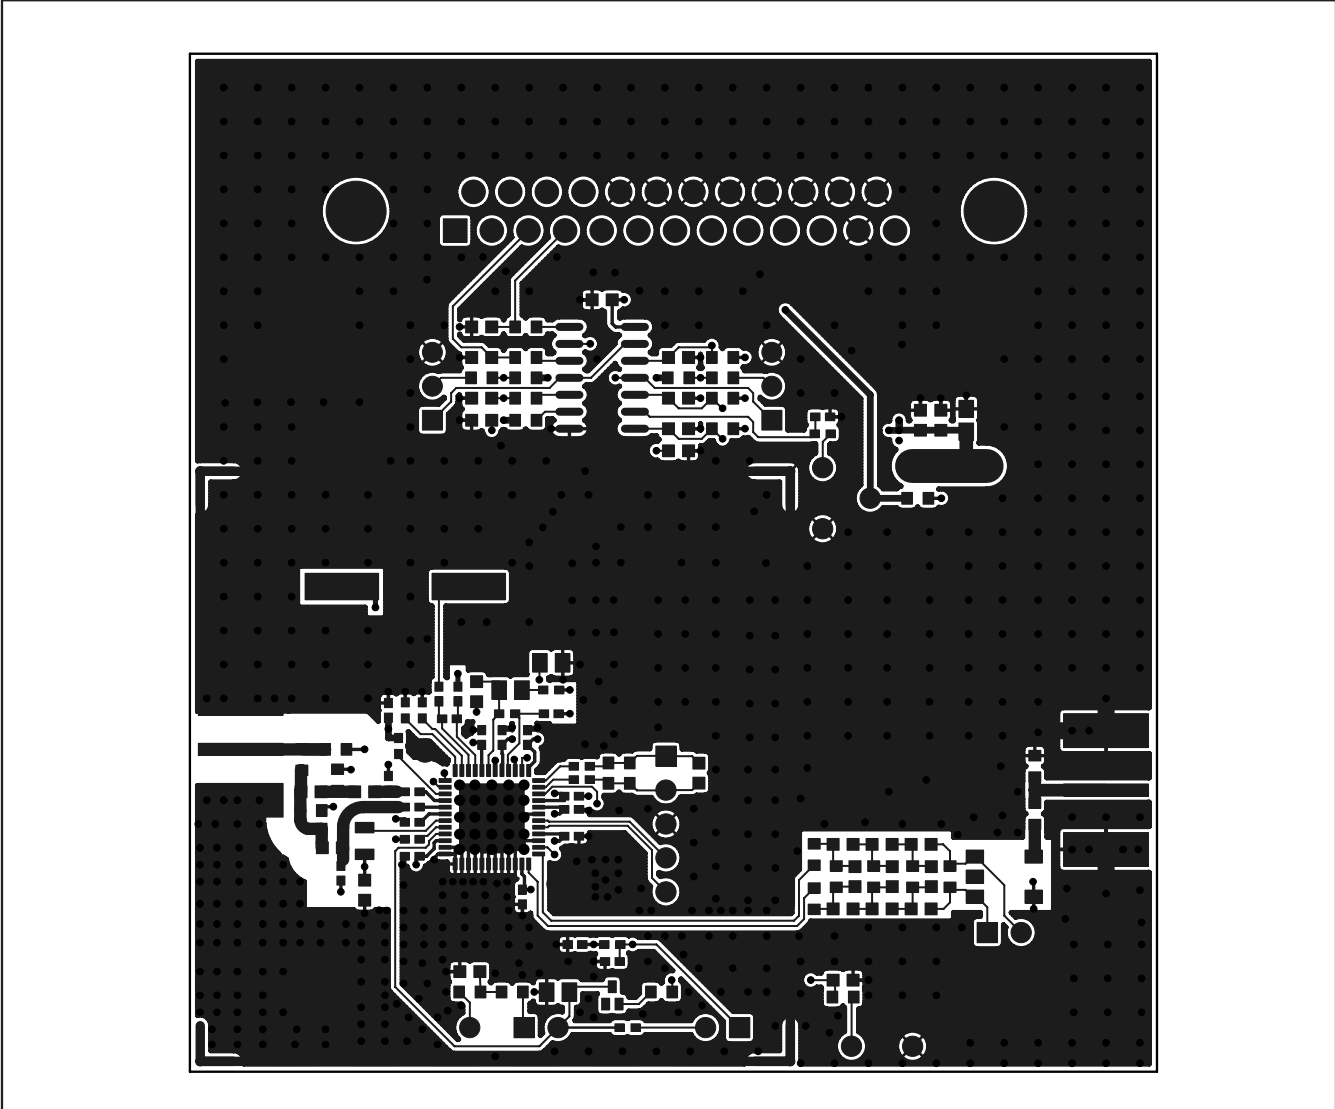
MAX3541/MAX3542 EV Kits PCB Layout—Primary Component Side
